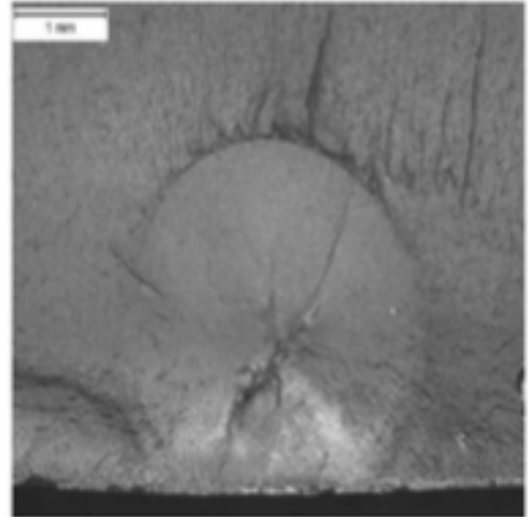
photograph of an inclusion in failed gear tooth. Crack initiation has occurred at large defects and it is believed that subsequent propagation has given rise to the circular features on the fracture surface.
